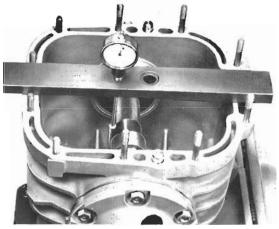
Mandrel and drive pinion setting tool in place.
